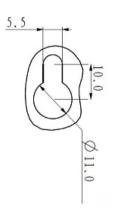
Dimensions: Keyhole in Detail(KBox C-101-0)
